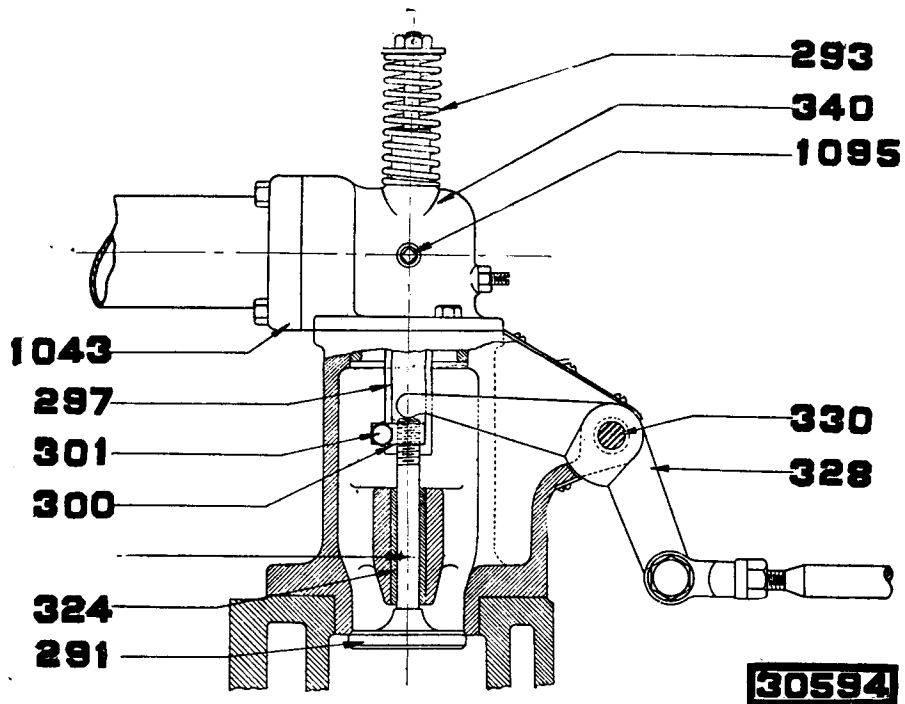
Gas Inlet Box (Showing old type valve)
